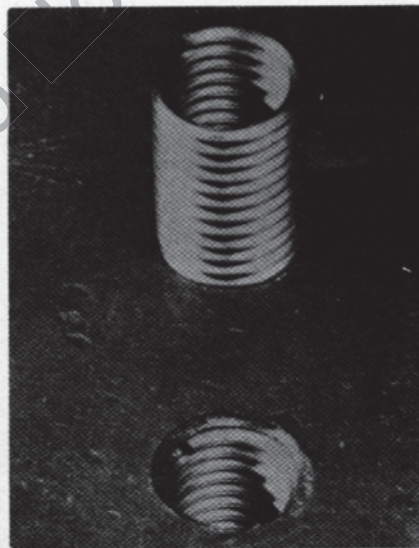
A thread insert and a complete repair are shown above. Special tools are provided in thread repair kit for installation of thread insert.
